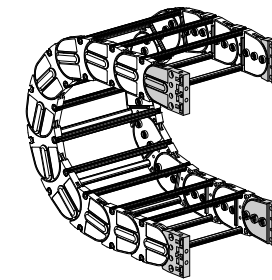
Fig. A The chain can be fixed frontally, inner or outer radius. (Fig A)
